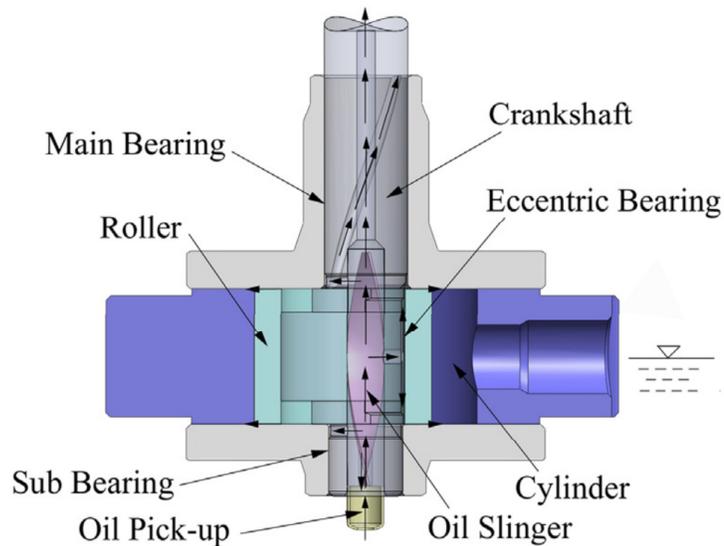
Oil supply in Pump Assembly of Compressor [24]
